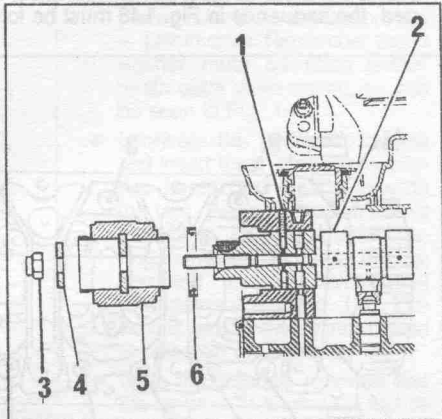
Fitting the camshaft oil seals. An arrangement of tube, washer and nut can be used to fit the seals.
